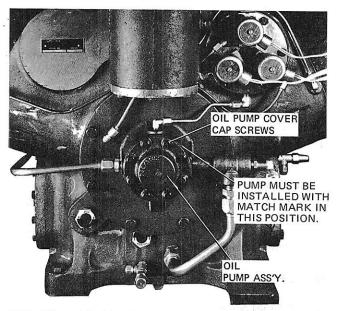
OIL PUMP END OF COMPRESSOR — EARLY STYLE A COMPRESSOR
